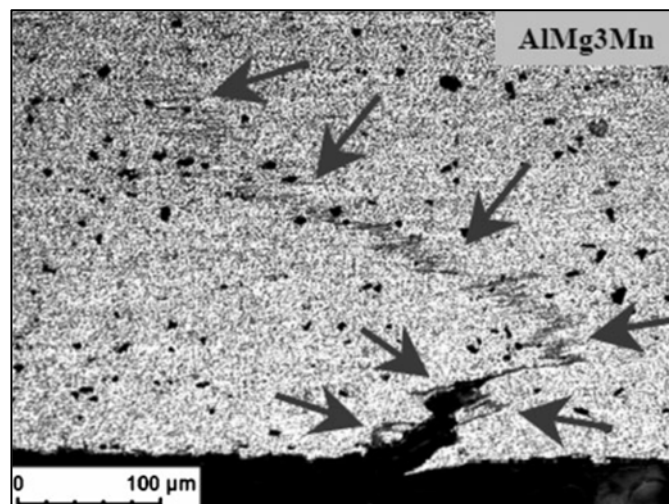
32 Cross-section of 5454 FSW specimen with crack after tensile test along kissing bond[109]
